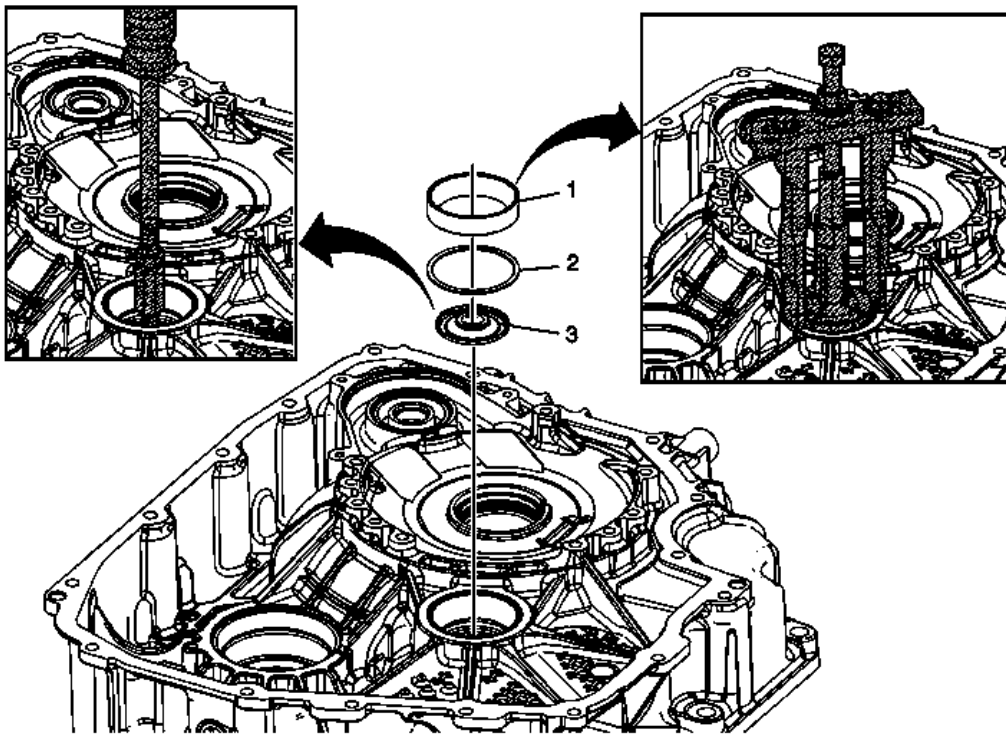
Front Differential Drive Pinion Bearing Cup, Washer & Lubricant Dam - Torque Converter Housing Side
